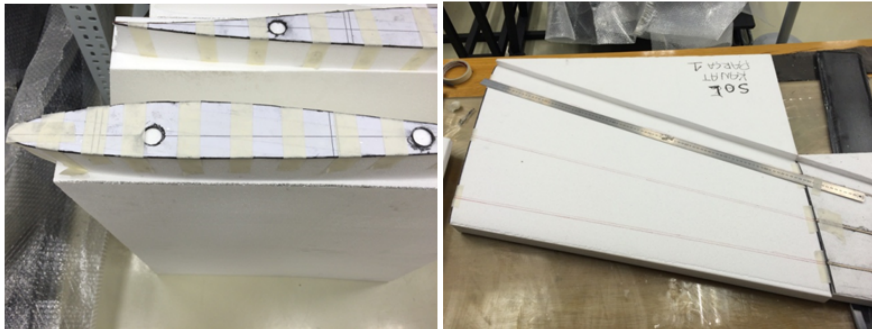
Gluing of the end ribs and drawing the spar locations
